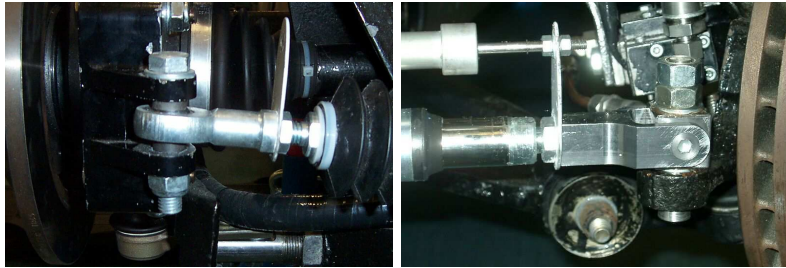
The modified steer actuator end joints - the old ball-and-socket joint (left) and the new universal joint (right).
